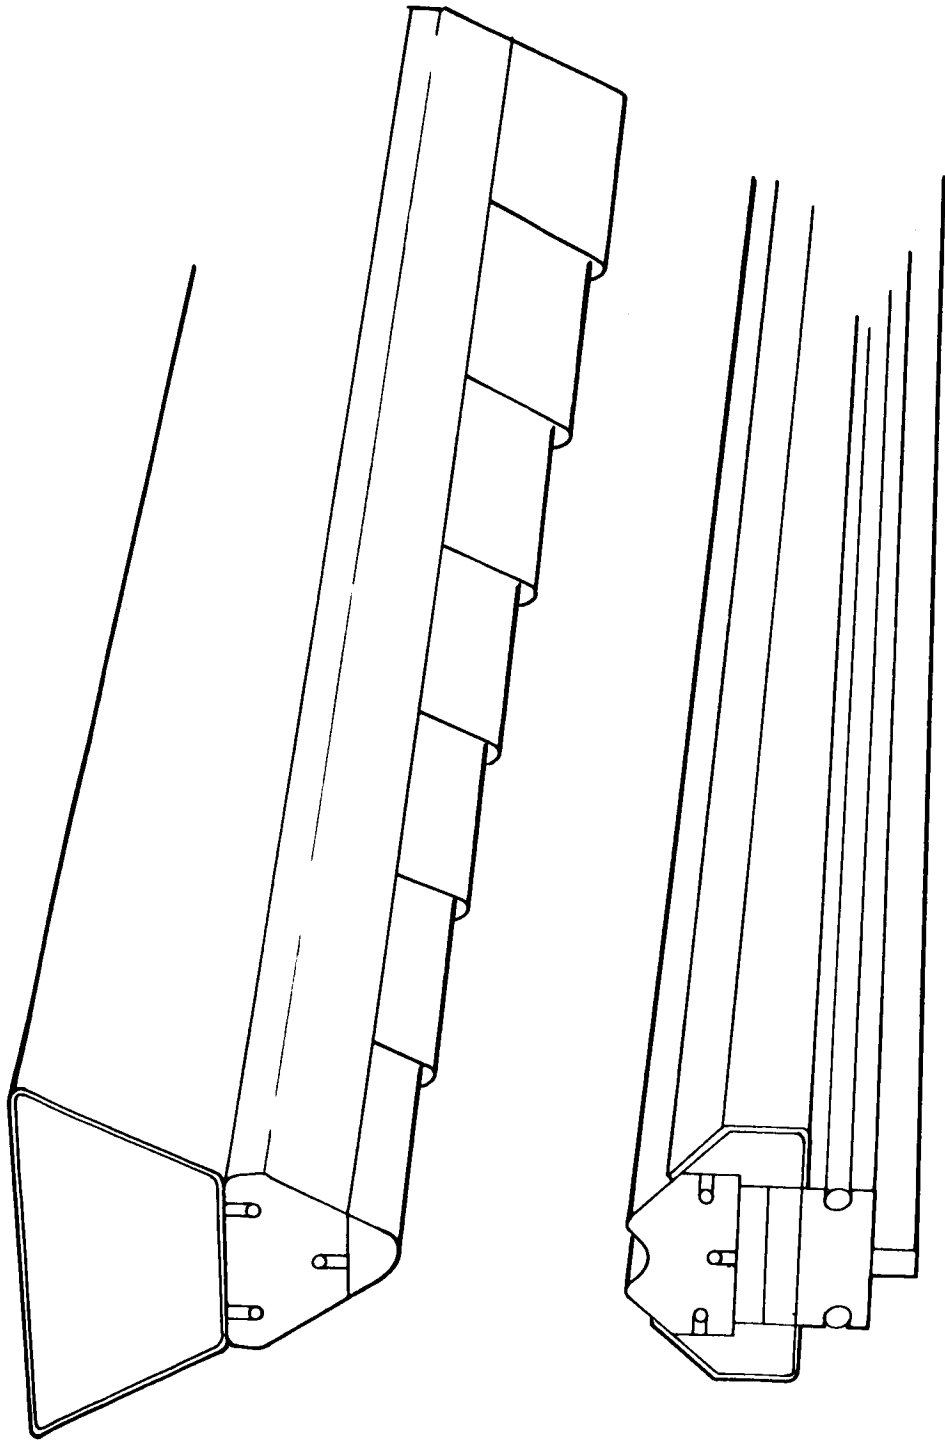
MULTIRADIUS BRAKE DIE (REF. 55)
